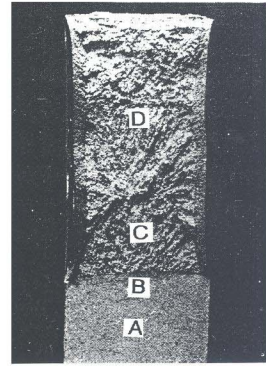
Macro-photograph of fracture surface CT specimen
